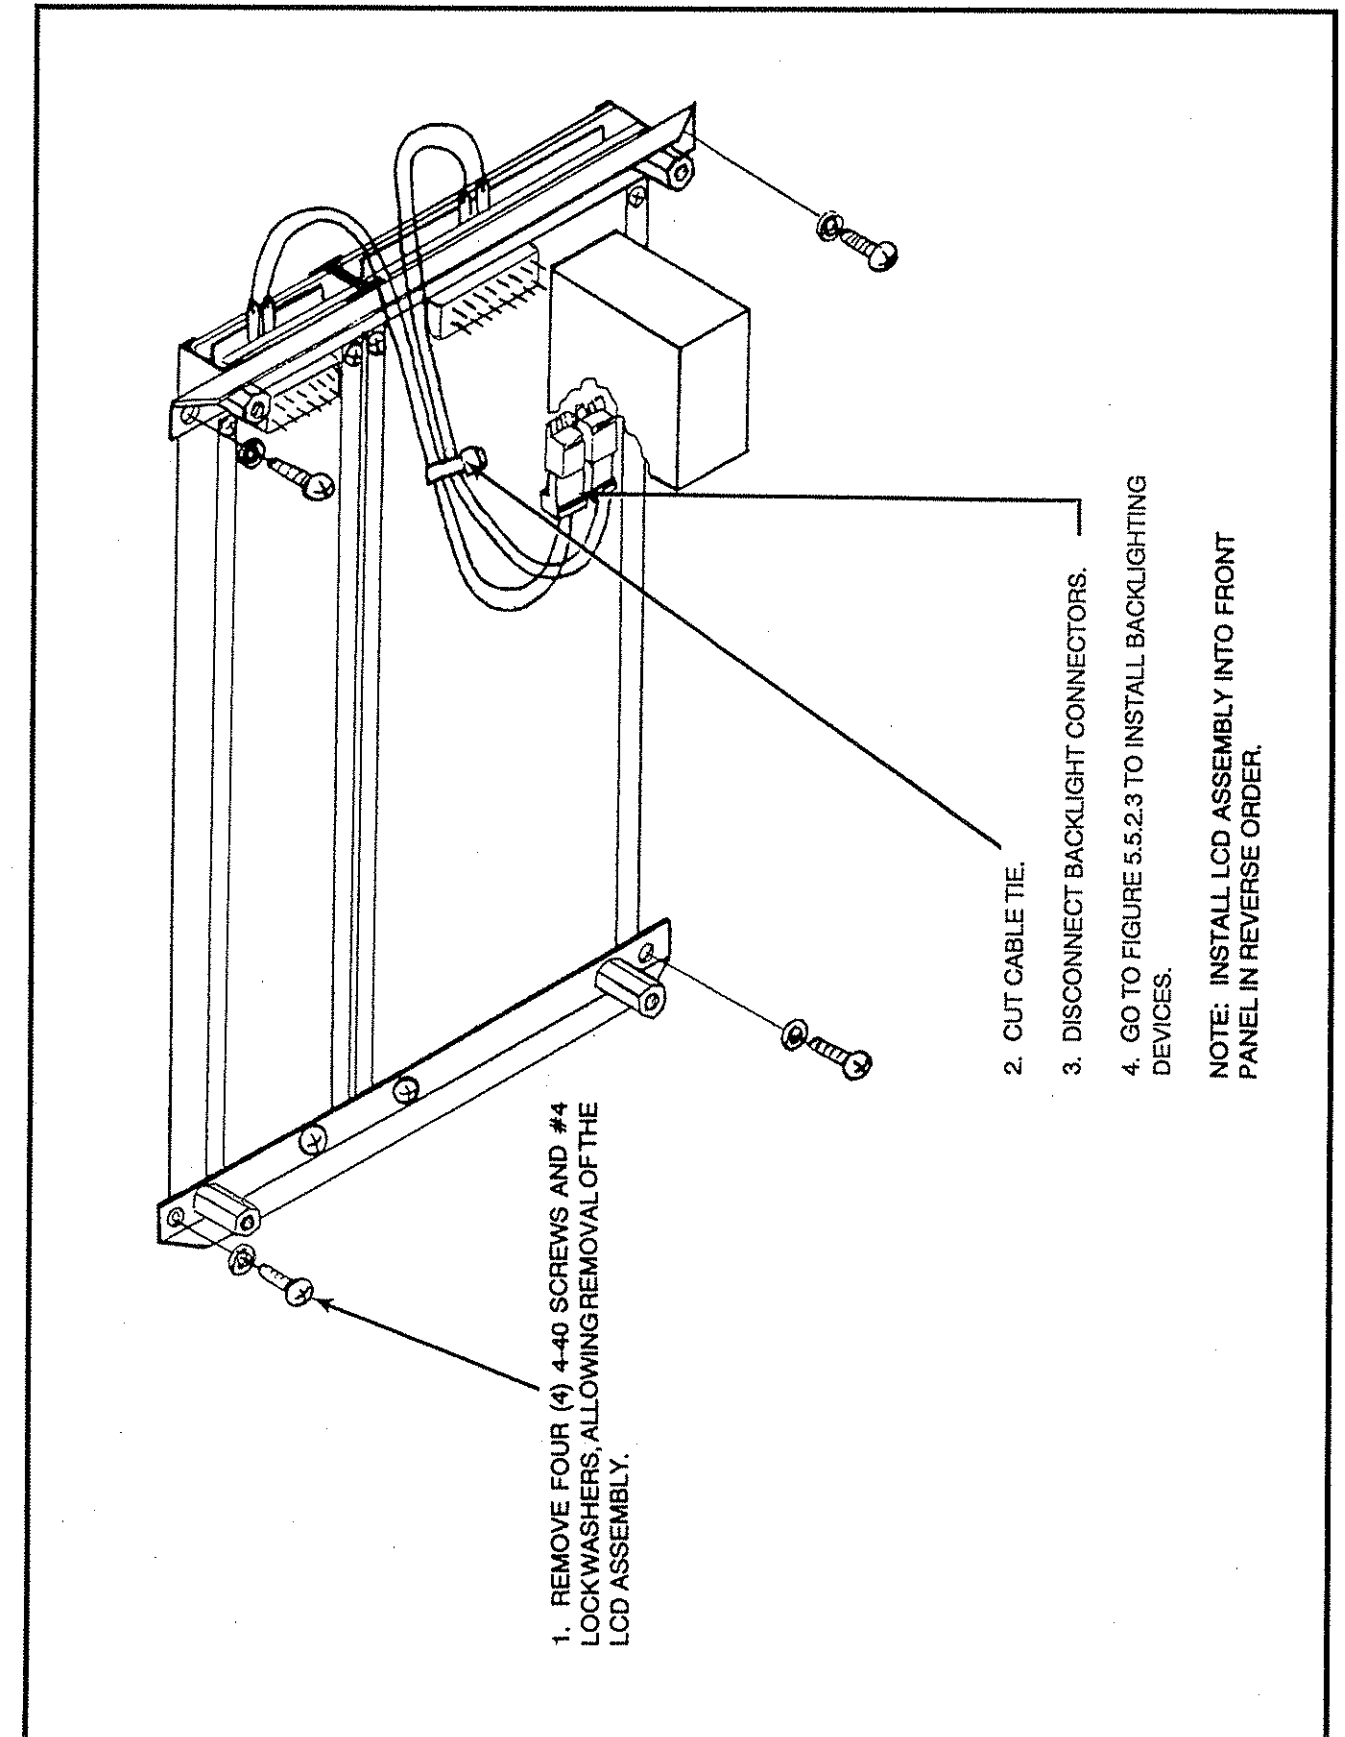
Removal and Installation of LCD Assembly.
